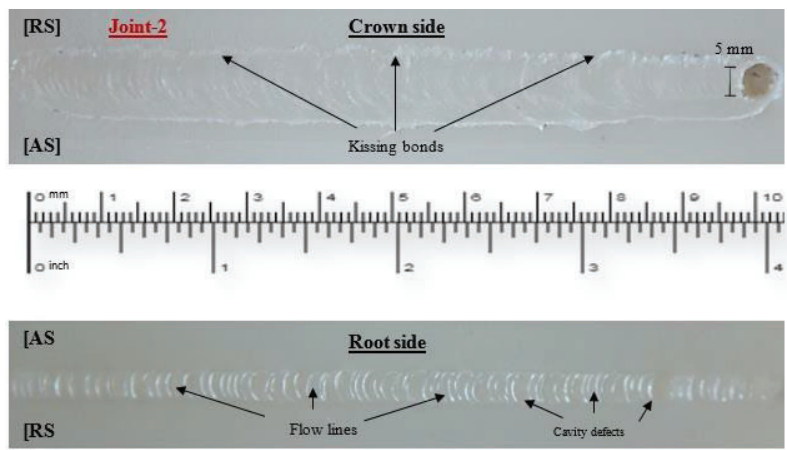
Joint-2 material flow, surface finish, and surface defects
